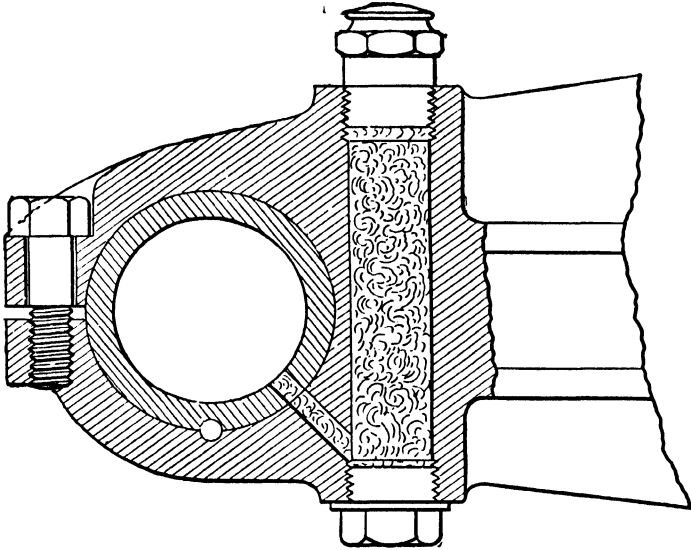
Felt-oiling arrangement for grinder spindle.
